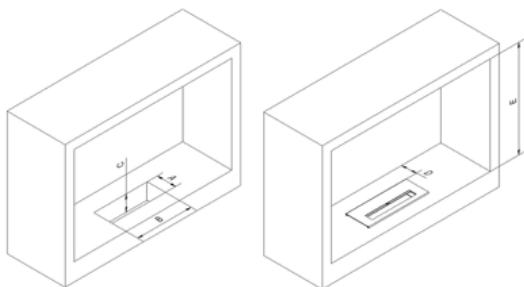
Dimensions of the recess and mounting hole for the bio-bins
